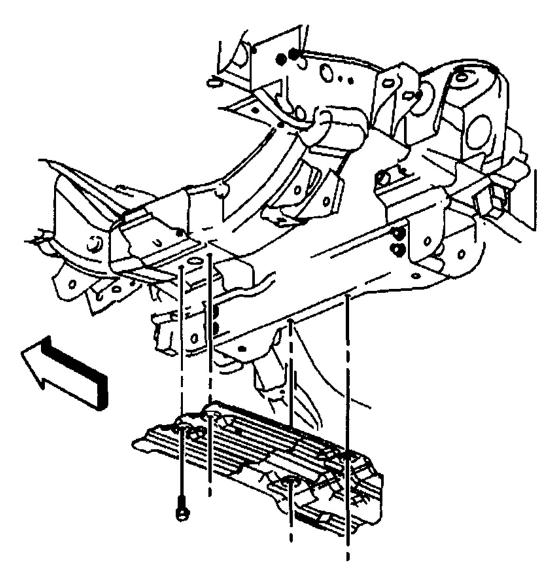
View Of Access Plugs For Oil Pan Rear Nuts Courtesy of GENERAL MOTORS CORP.
